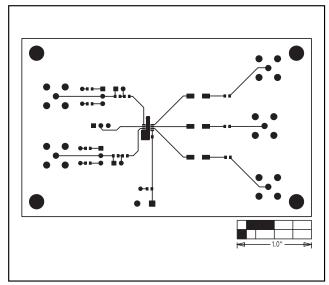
MAX7443 EV Kit PC Board Layout—Component Side
